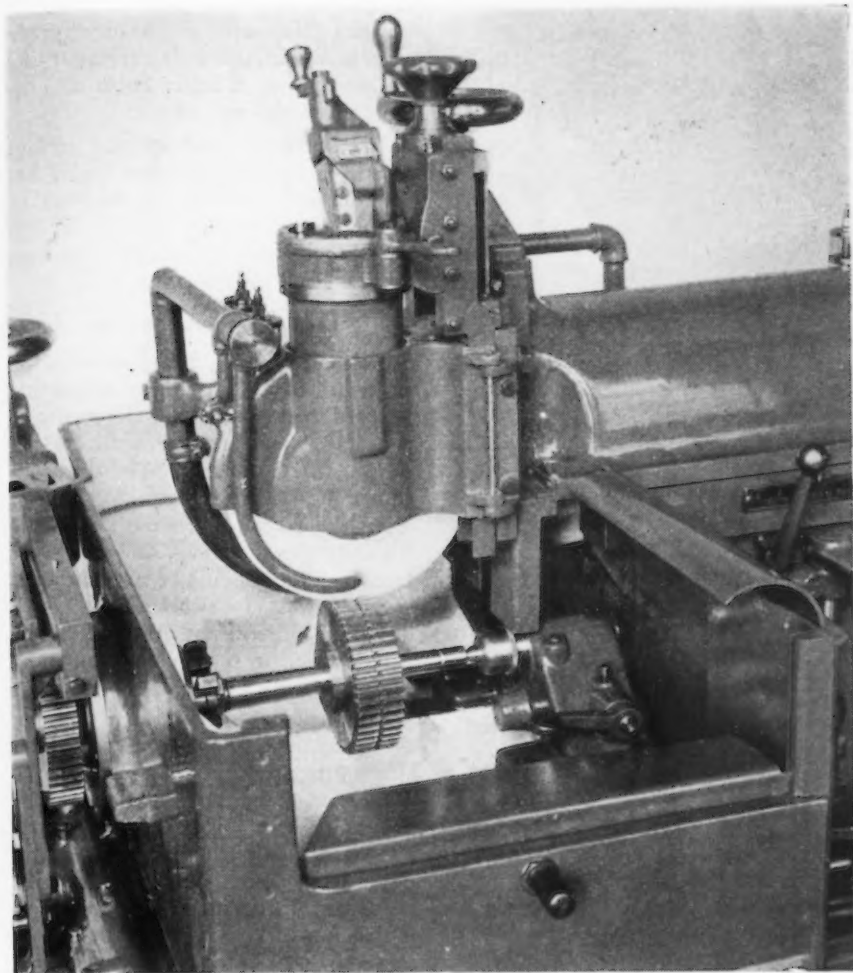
Type of arbor or adapter used when gears must be located on an external bearing.
